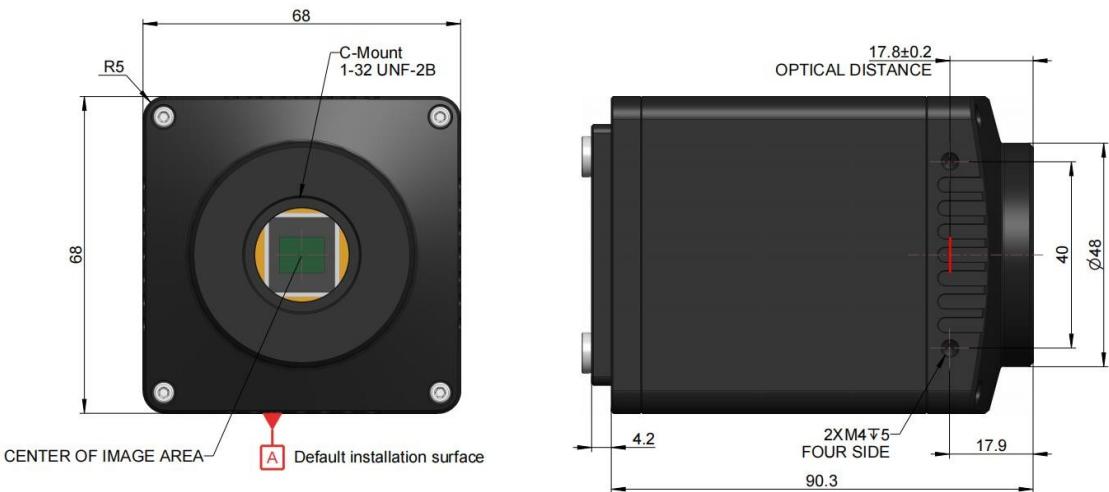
The Front and side view dimensions of the MaxCam-331 series
